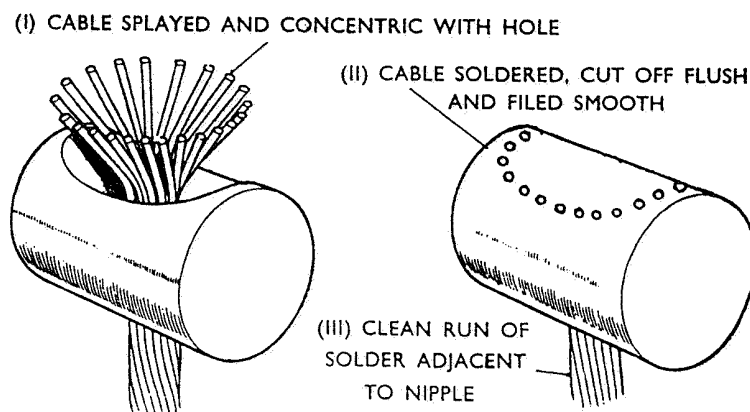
SOLDERING NIPPLES TO STRANDED CABLES
